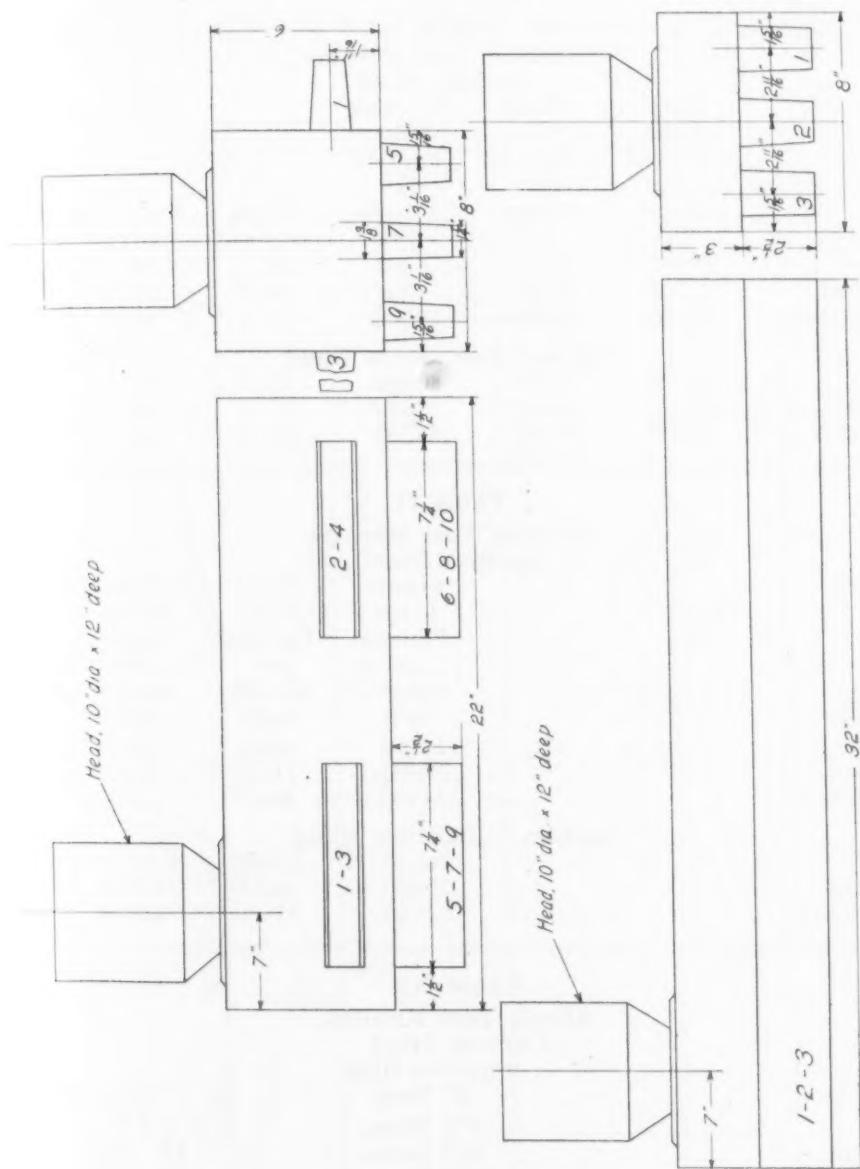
Sketch showing the Method Used in Casting Test Bars for this Investigation.
